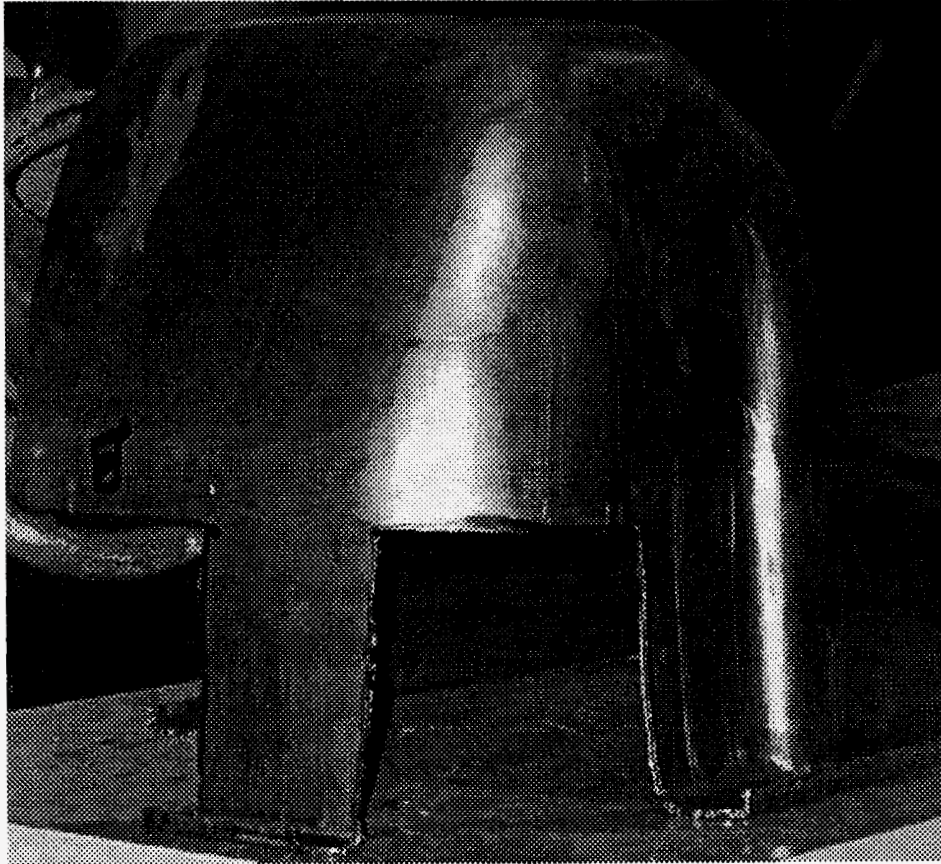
Photograph of oil pan showing sections removed for high strain fatigue specimens.
